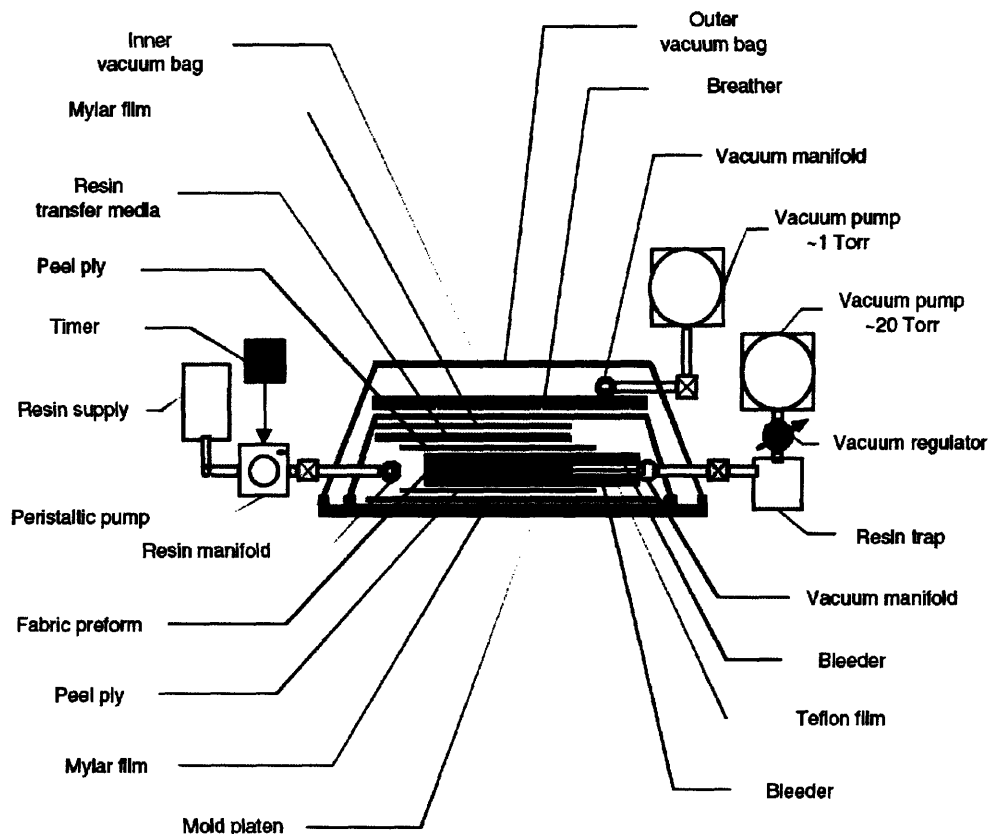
Vacuum assisted resin transfer molding (VARTM) configuration [65].
